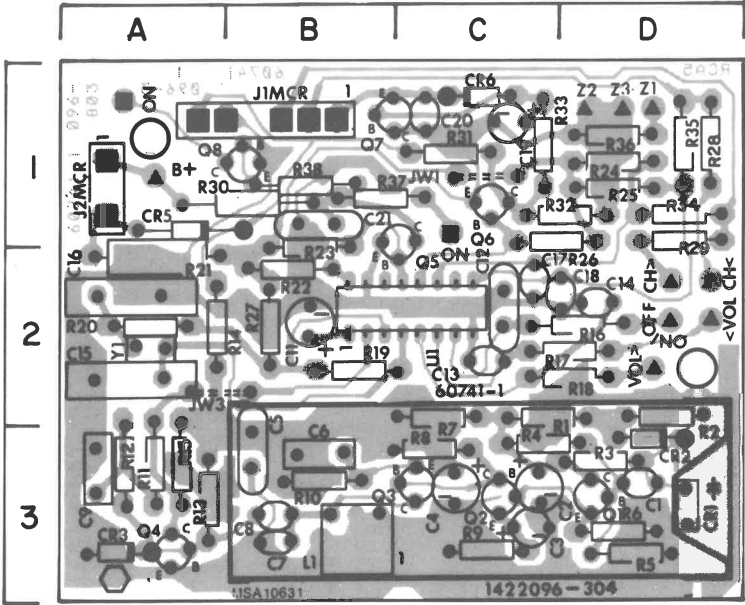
MCR 015A/17A Rev 1 Remote Receiver Module PW Circuit Board
